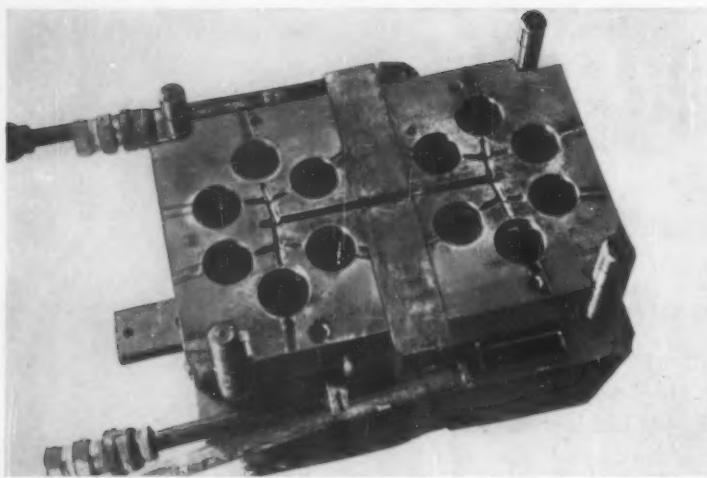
Twelve-cavity mold, also run in a 4-oz. machine, was used for molding disks. Cavities were 1½ in. in diameter
